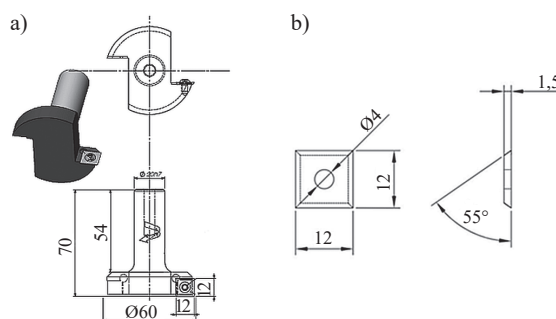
Diagram of a two-flute end mill: a) mill dimensions and shape; b) blade geometry
